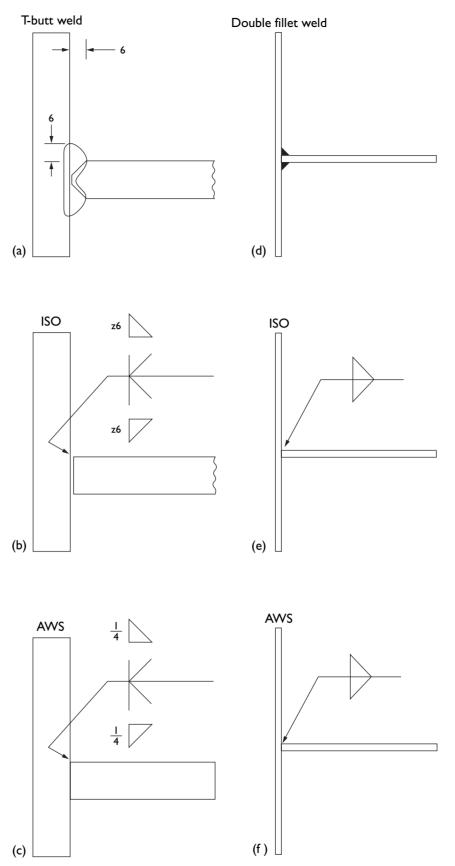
(b) shows the T-butt weld represented by symbols which convey all the information according to the ISO standard.
